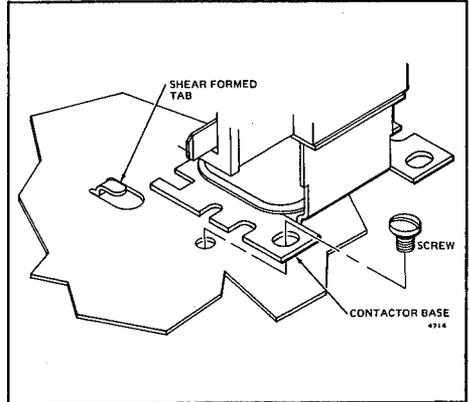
Typical relay or contactor mounting in shear formed panel with 1 screw.
